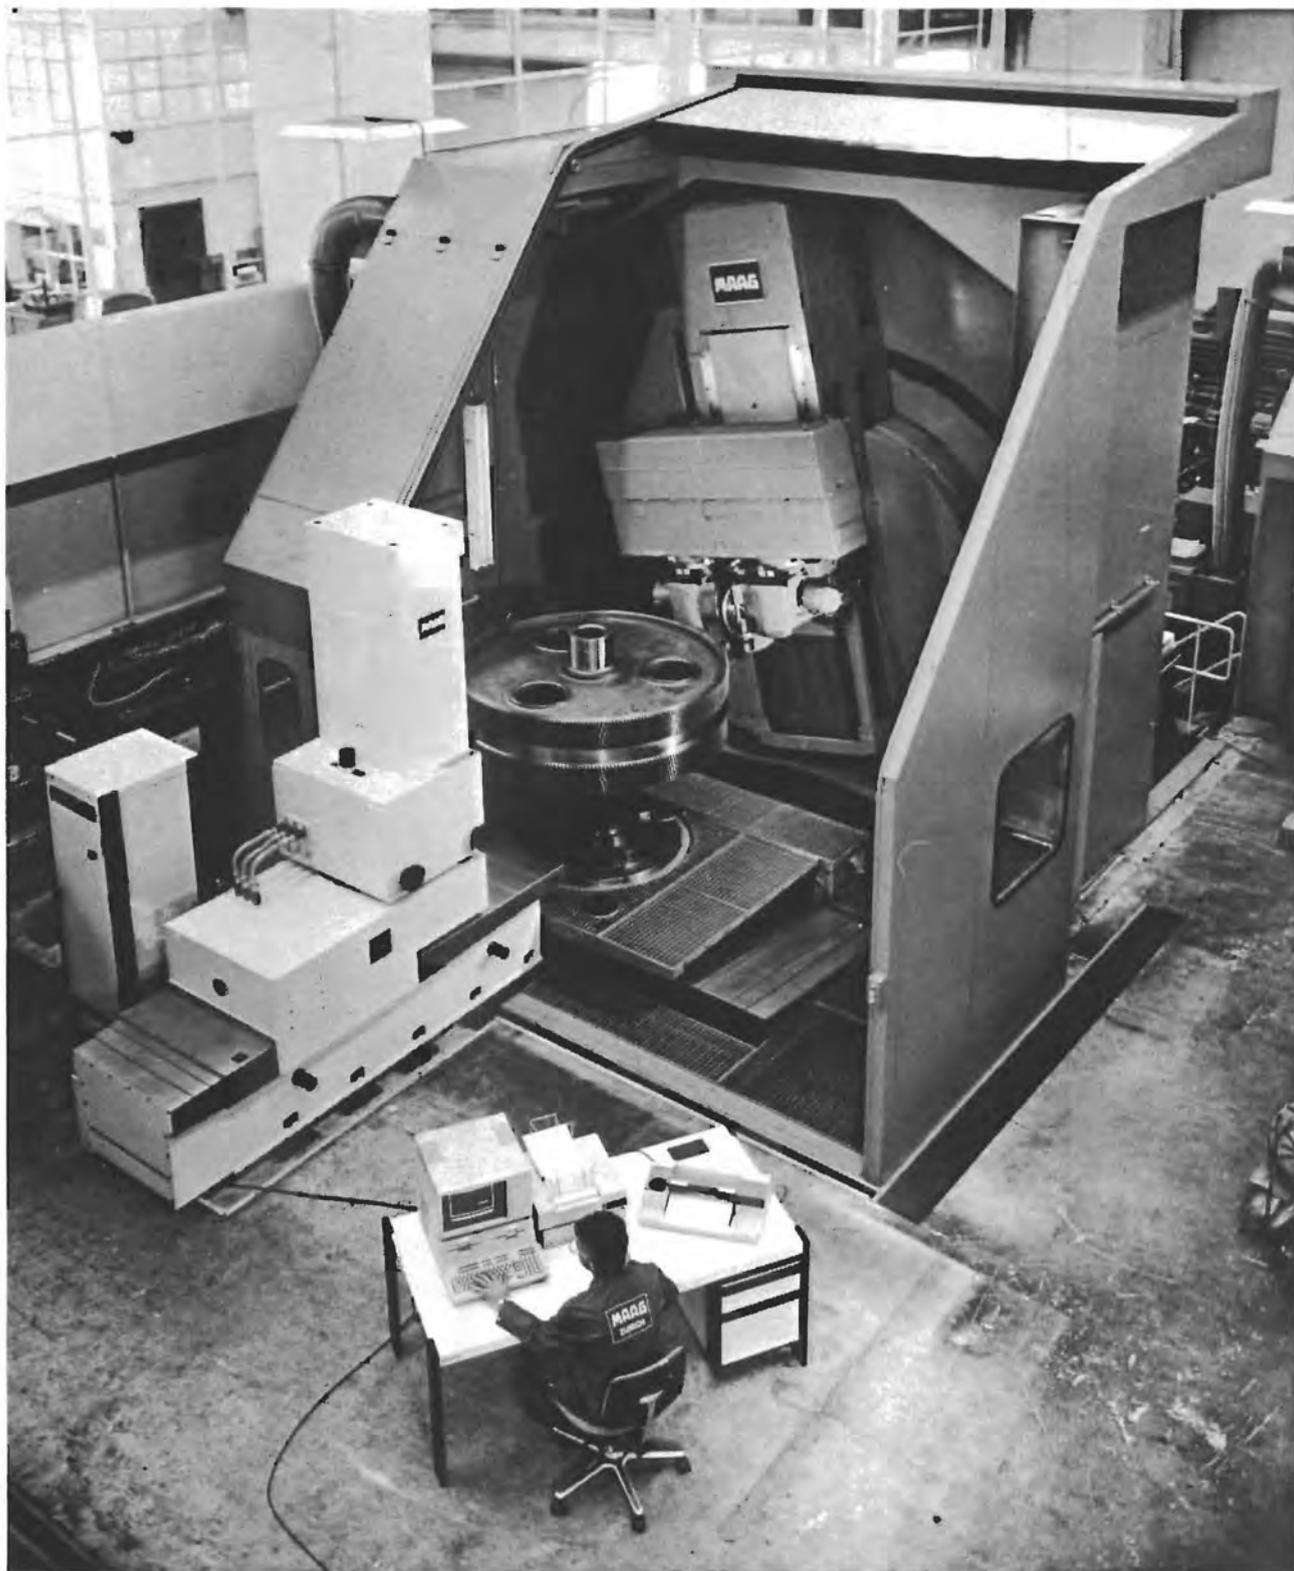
CNC gear measuring center MC-200 on a SE-200 grinding machine
